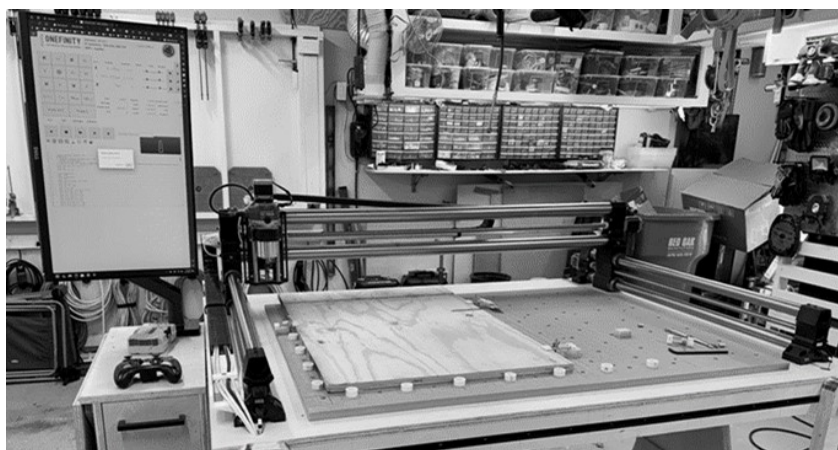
Three-axis CNC milling machine equipped with a Marposh MEMS vibration sensor.
